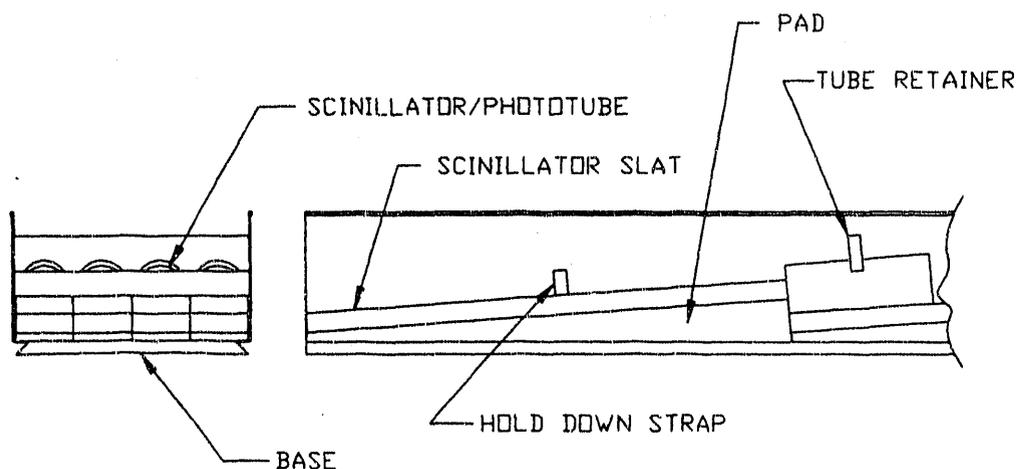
J-4 An engineering drawing of a shingle counter assembly.
